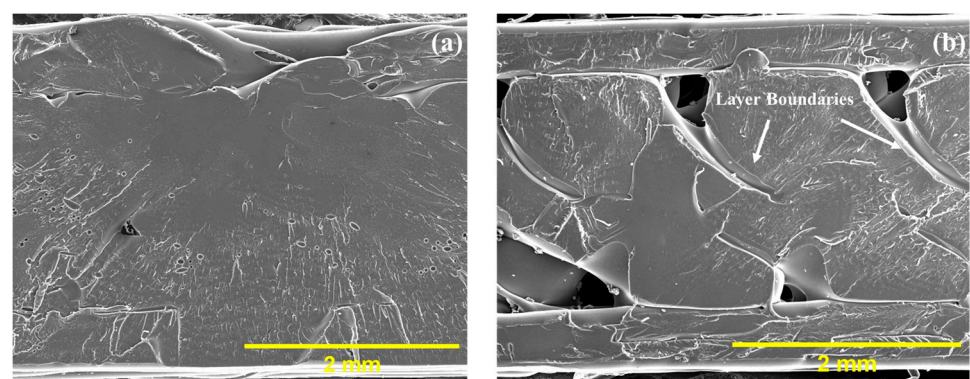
Tensile fracture morphology of PCTG Z (a) 2B and (b) 4B designs.
